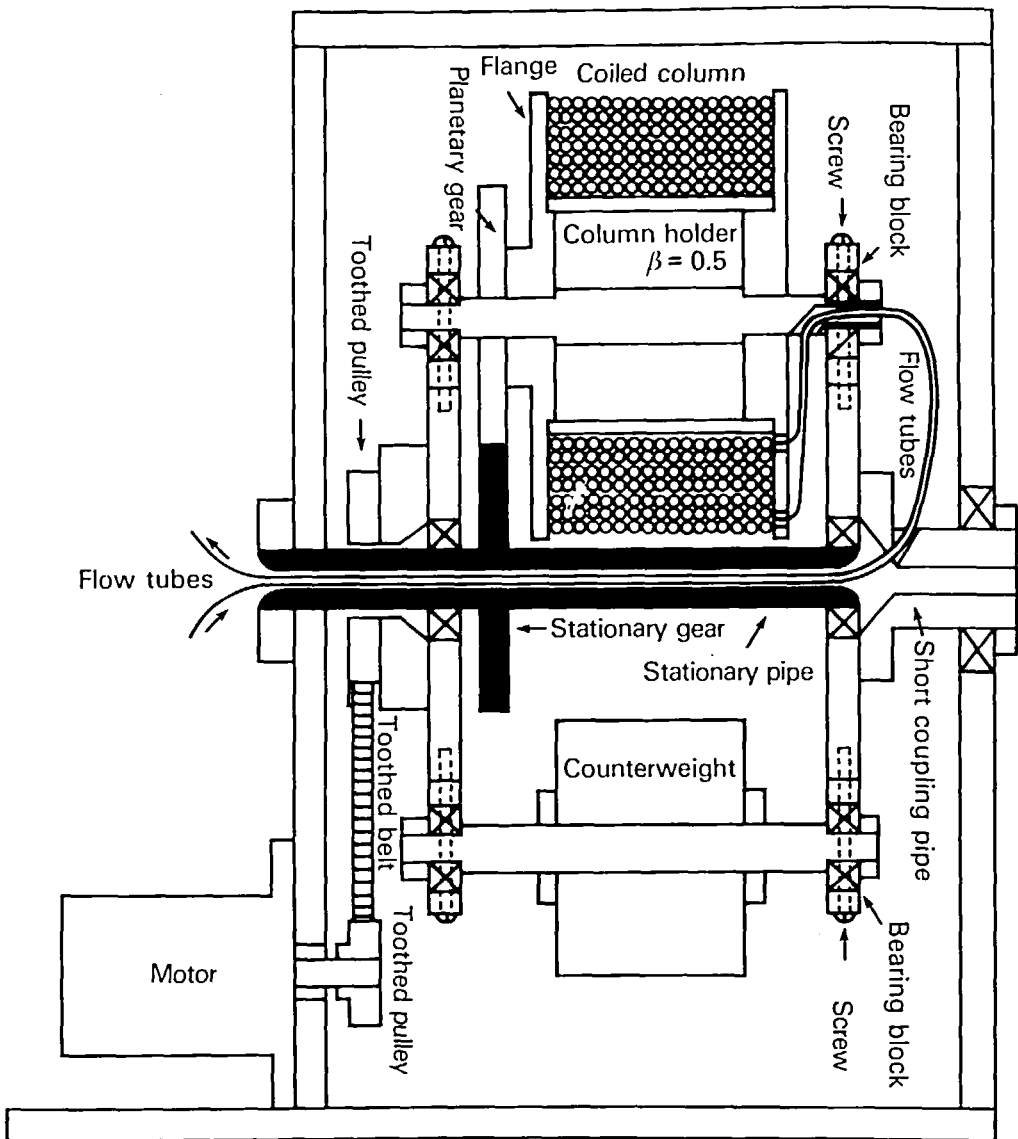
Cross-sectional view of a coil planet centrifuge with a large multilayer coil.
